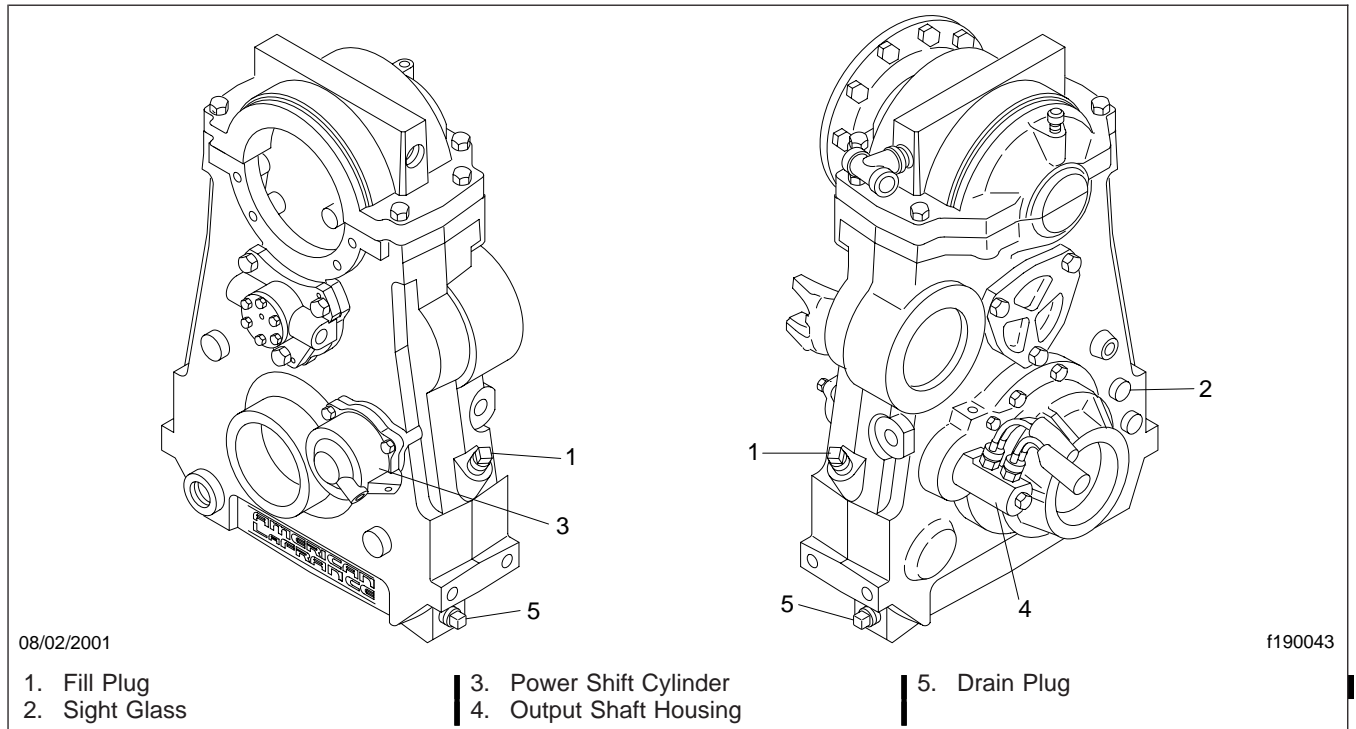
, Fire Pump Gearbox Lubrication and Fluid Change Locations
